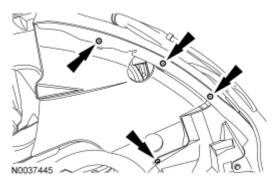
Locating RH Fender Splash Shield Screws Courtesy of FORD MOTOR CO.
